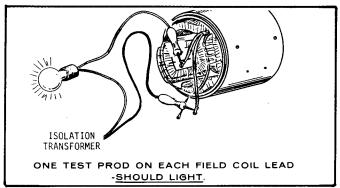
OPEN TEST FOR FIELD WINDINGS
